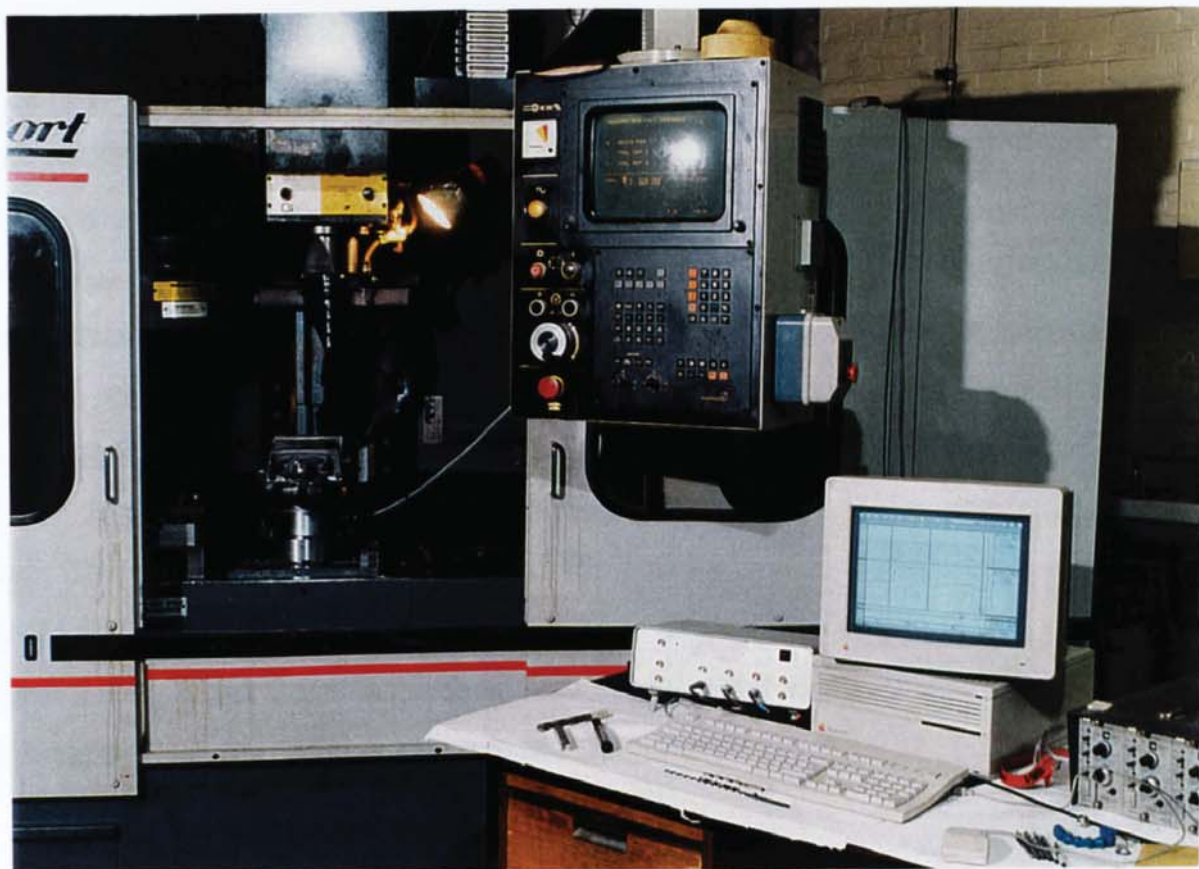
Photograph of Torshalla CNC lathe with force equipment
